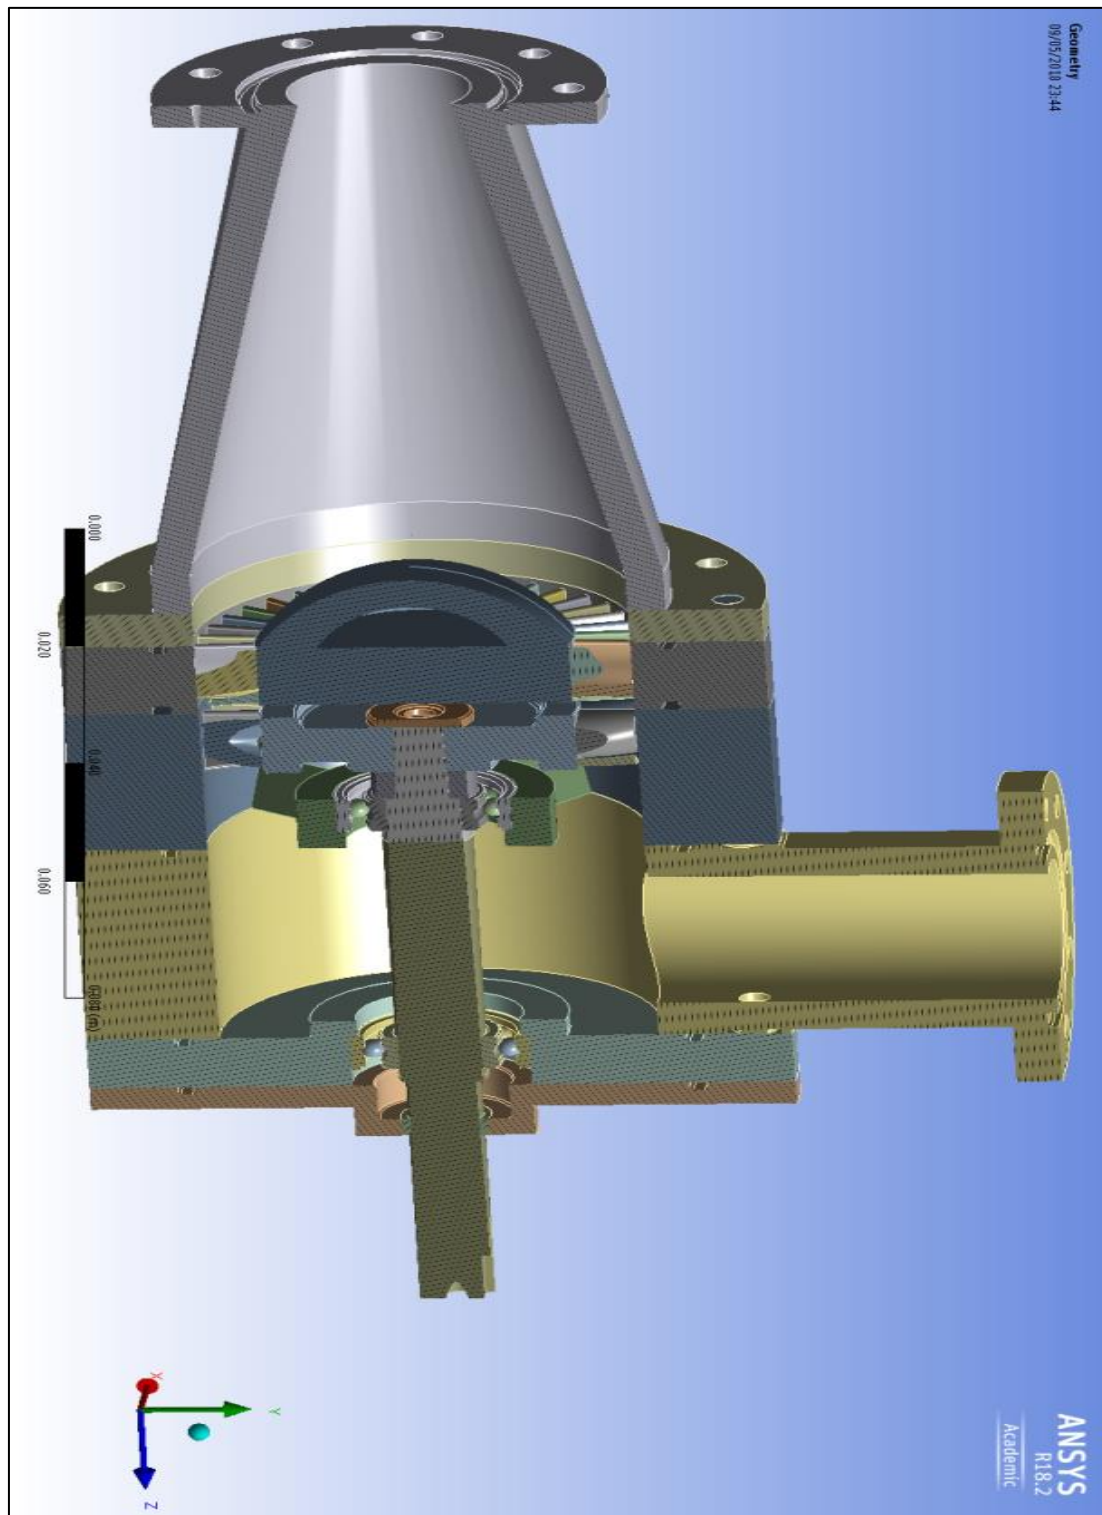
Complete turbine assembly 3D sectional geometry used in ANSYS structural analysis
